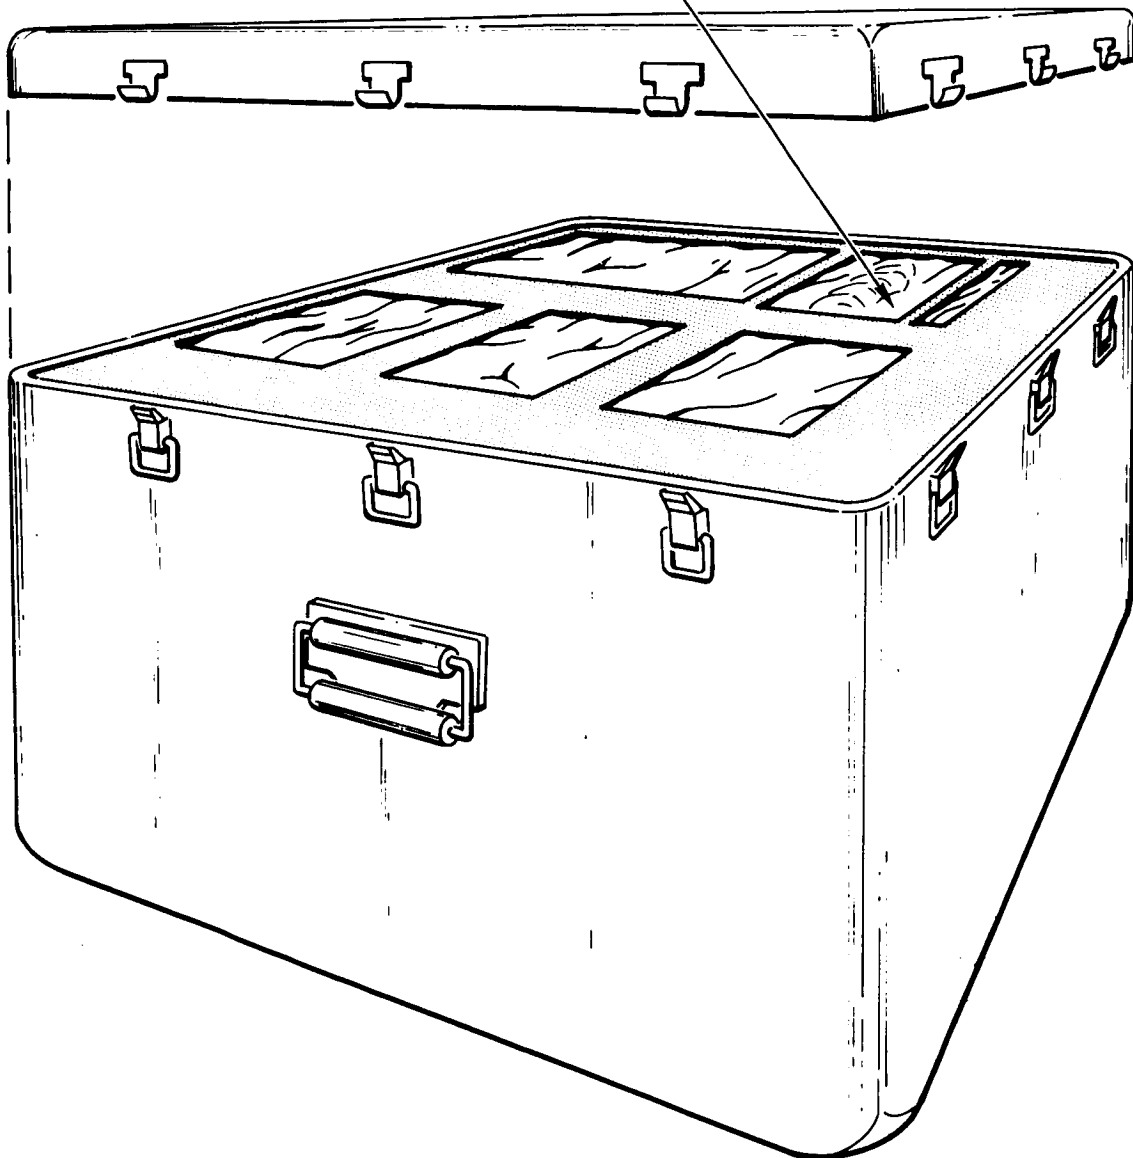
C7-53 Pneumatic Checkout Blanking Plate Set
